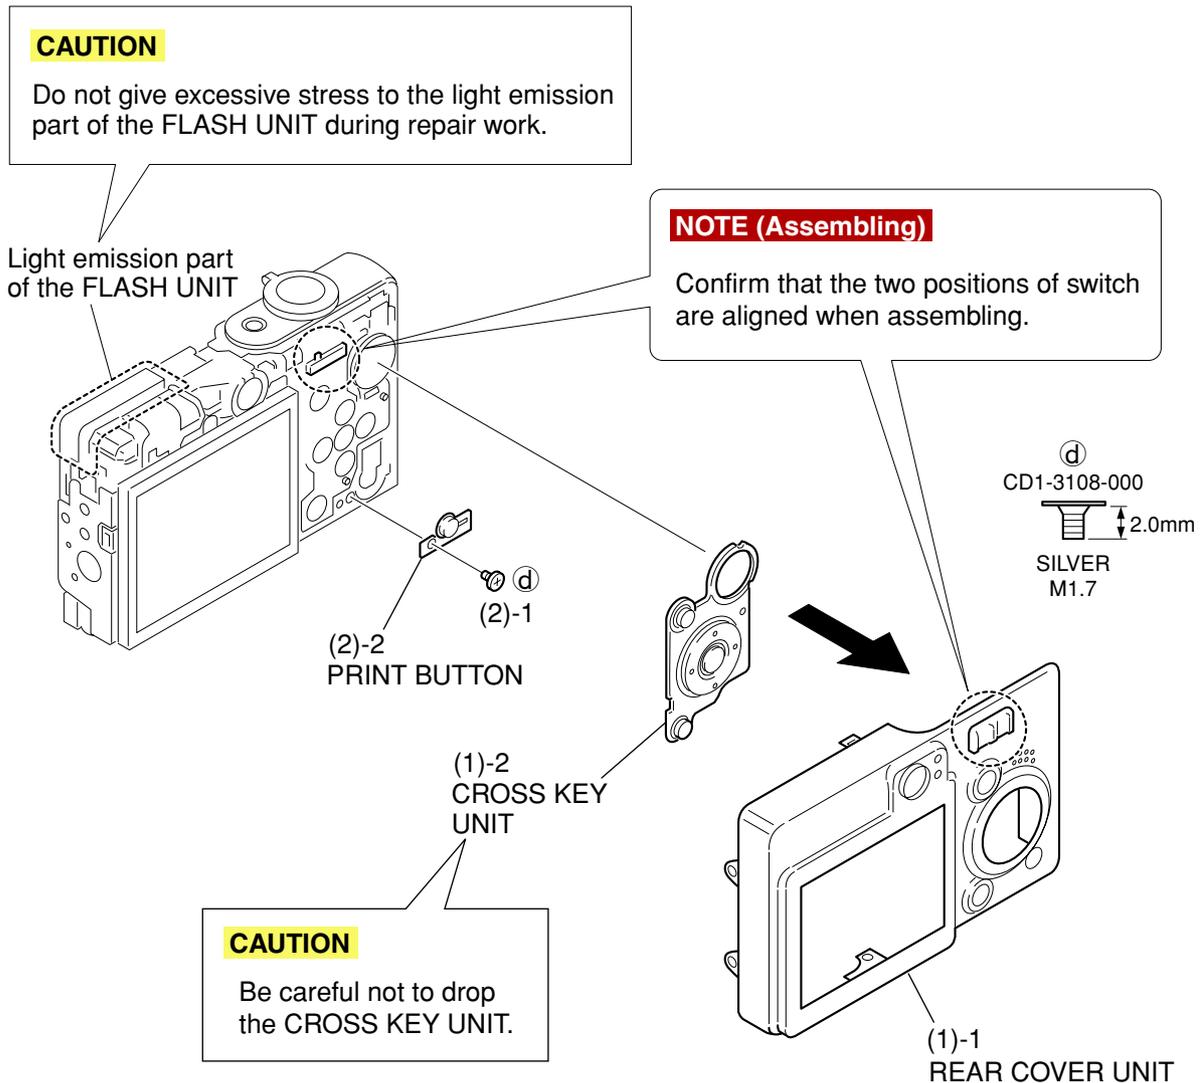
REAR COVER UNIT, CROSS KEY UNIT, PRINT BUTTON
